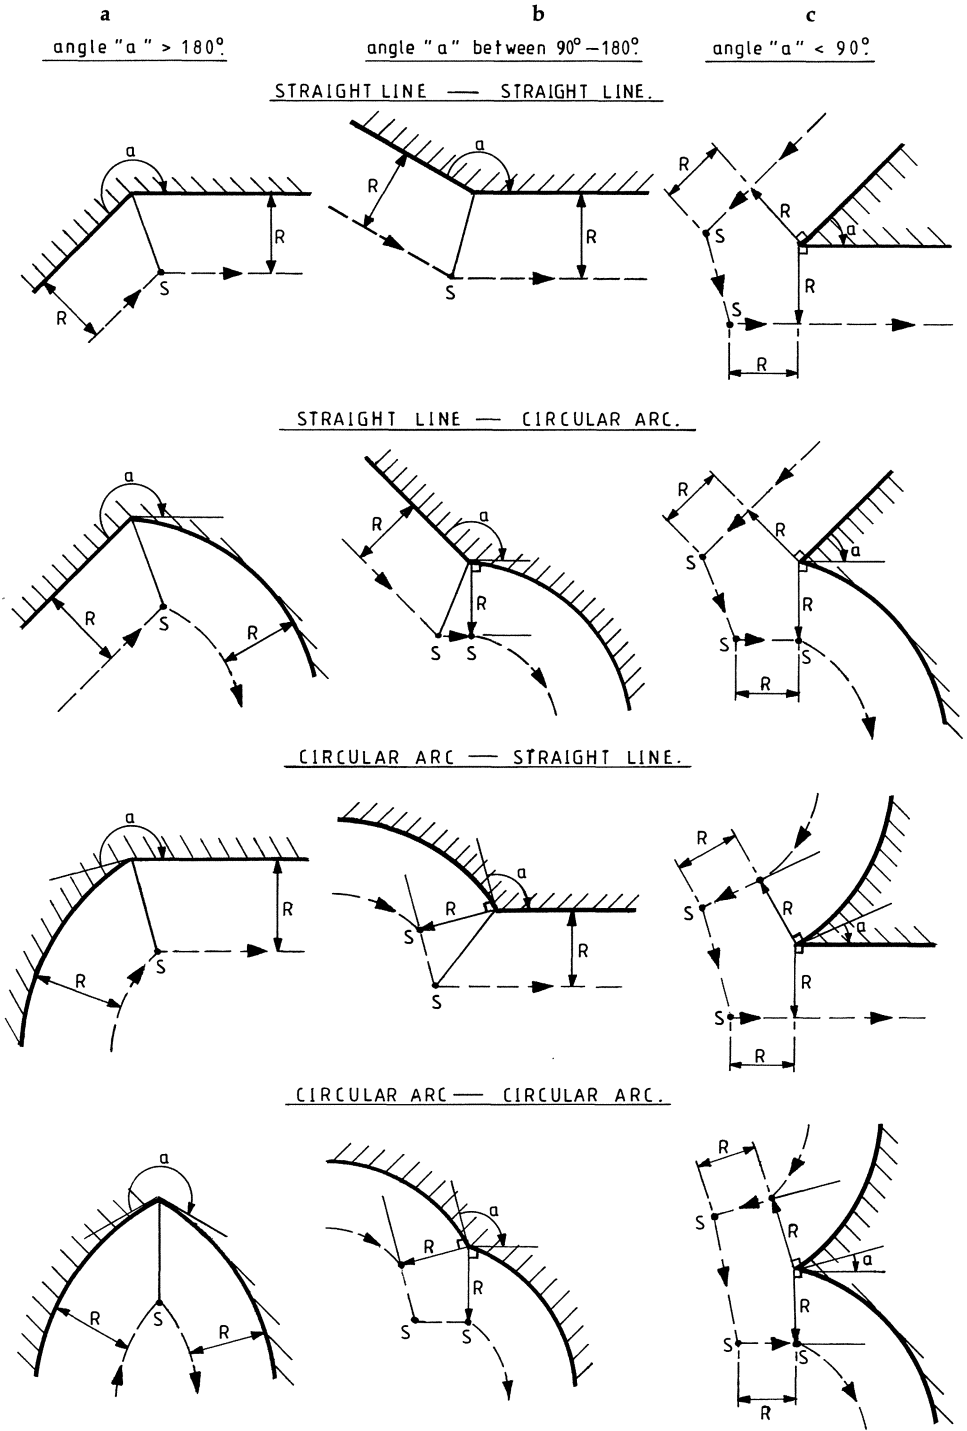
Tool compensation for various workpiece geometric transitions. [Courtesy of Siemens.]
